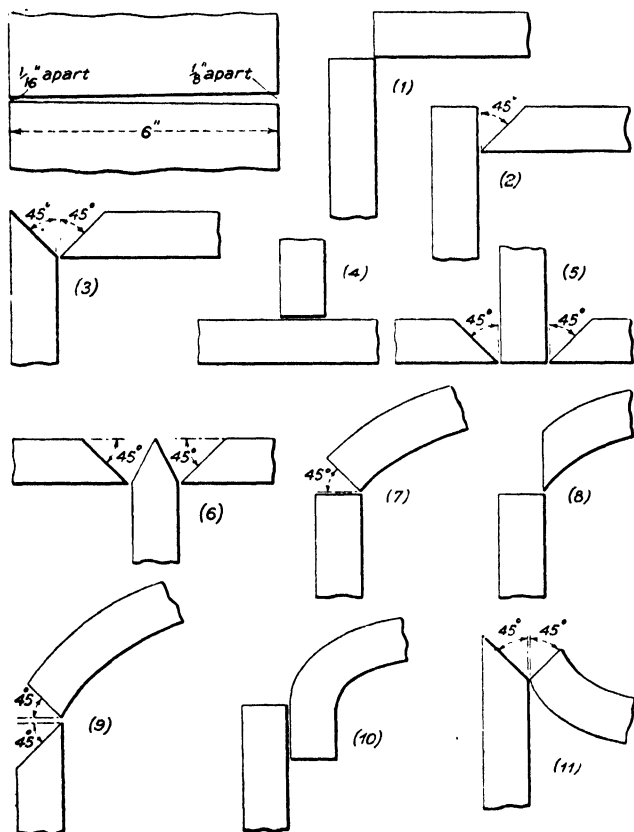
METHODS OF SETTING UP JOINTS FOR WELDING.
